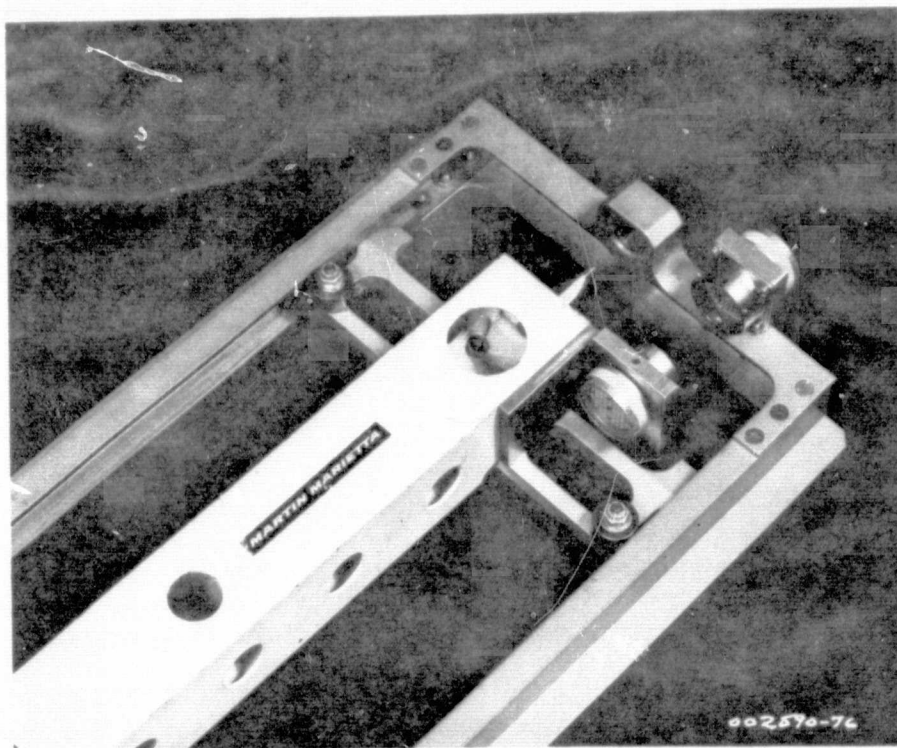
MIL-C-83723 Connector Mounted to NAS8-30820 Module Latch Mechanism
